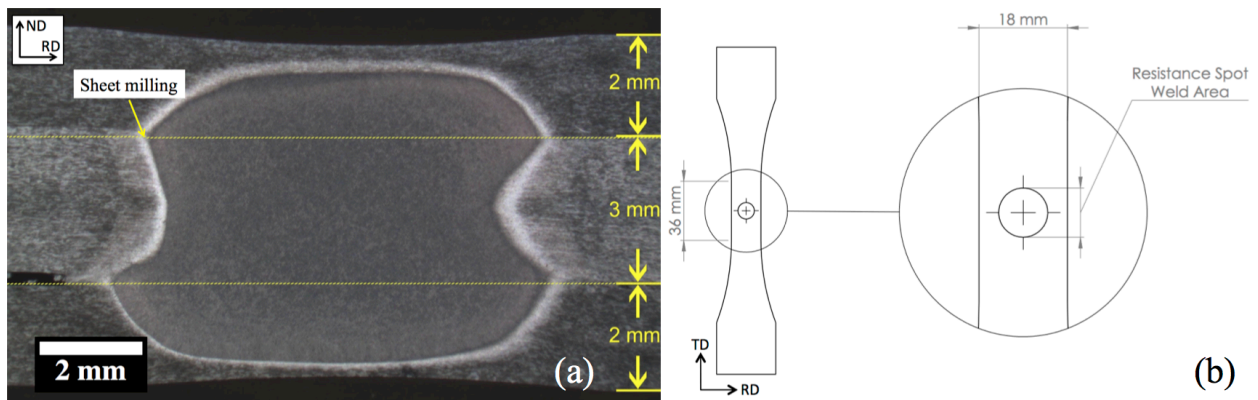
RSW design for fatigue tests. (a) Removal of top and bottom sheets from 2-3-2 stackup. (b) RSW nugget location on the dogbone specimen. Note that the nugget size is exaggerated here.
